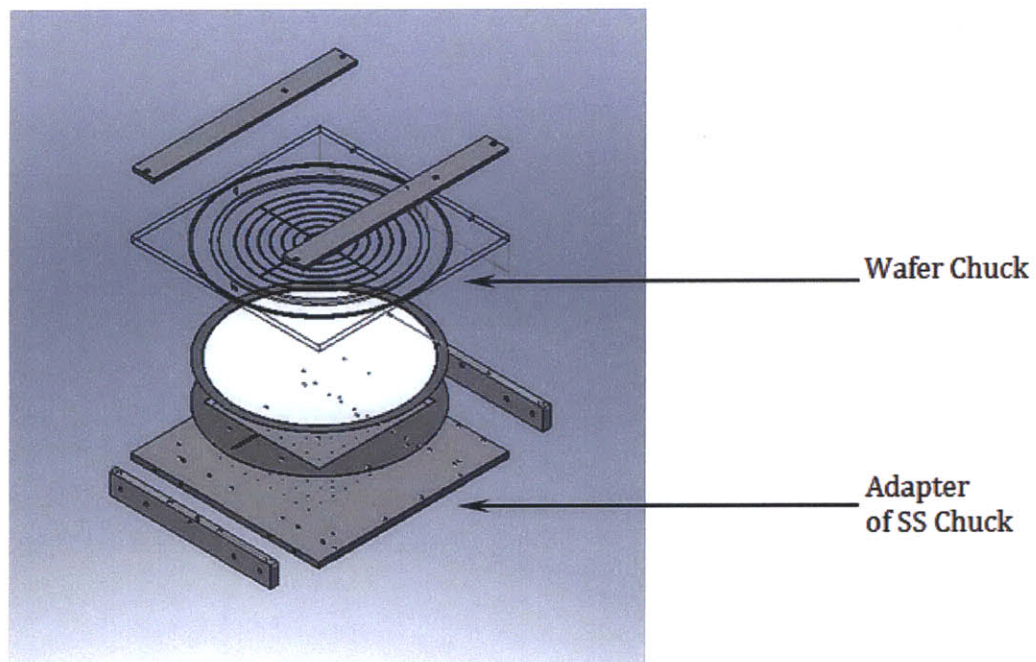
3D Model of Assembly for 12" wafer (exploded view). The wafer chuck is represented by a wireframe for a clearer view inside the structure <sup>[24]</sup>.
